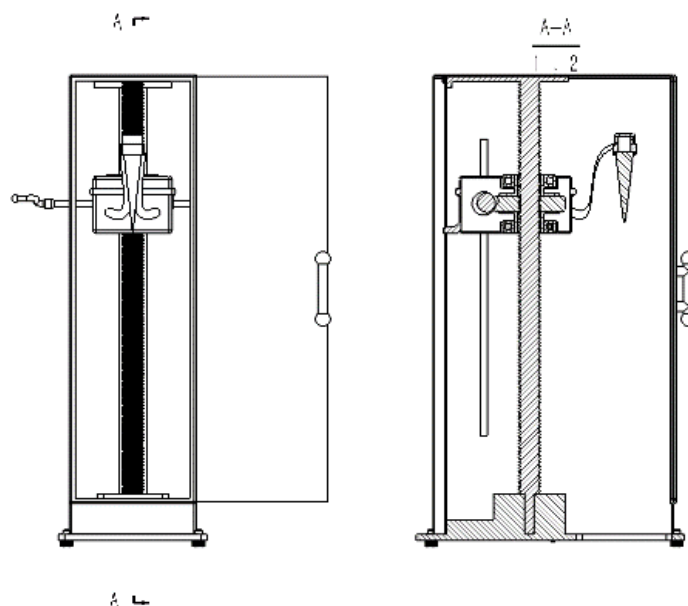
Appearance of penetrometer (left) and its A-A sectional view (right)
